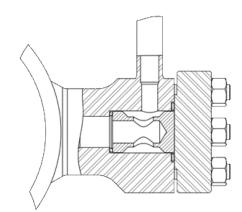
System Flushing testing fixture shown with open end to allow debris to pass without damaging surfaces
